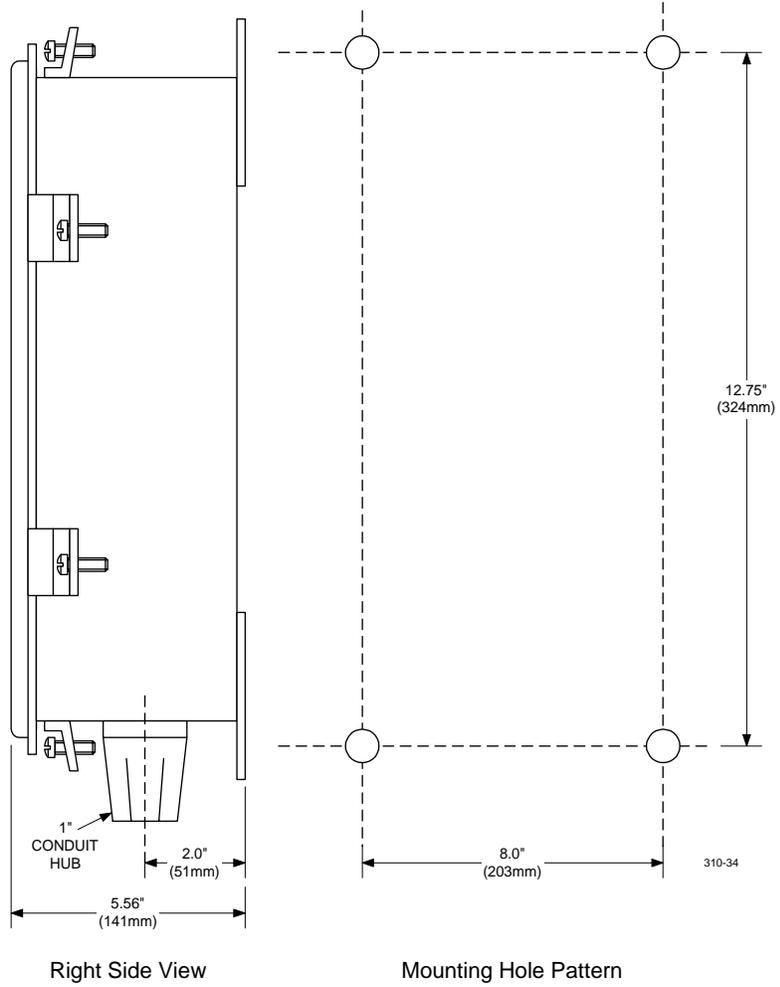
Surface Mounting Dimensions, Side View and Mounting Holes
